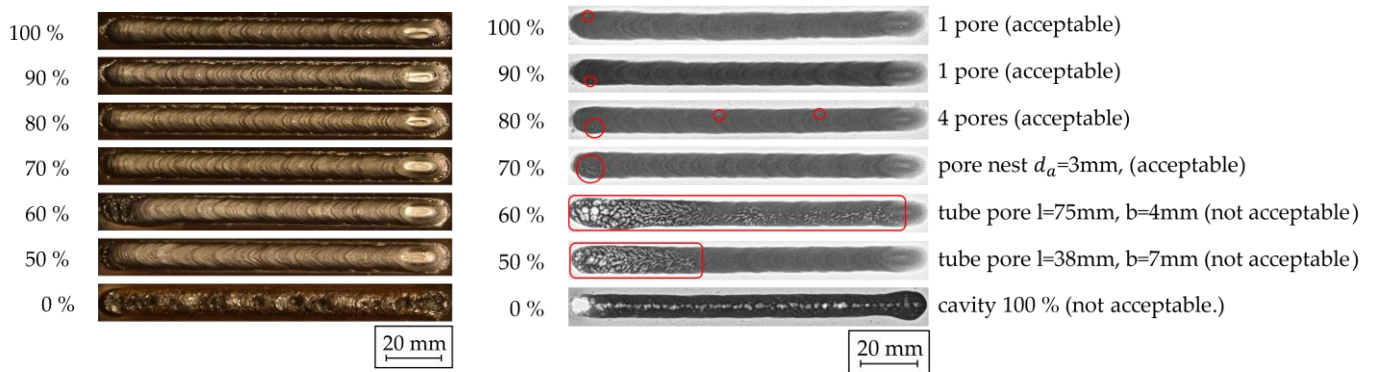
Top view of the welded beads with different shielding gas flow rates: (a) photo taken right after welding the bead; (b) radiographs of the welded beads with weld irregularities (marked in red) and their dimensions.
